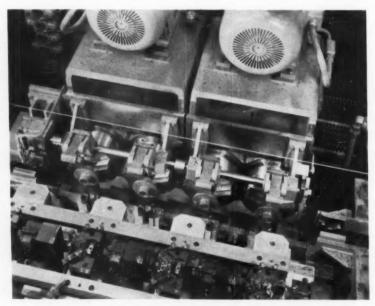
Work-pieces centered and securely clamped in the three-jaw chucks of the machine shown in Fig. 1
